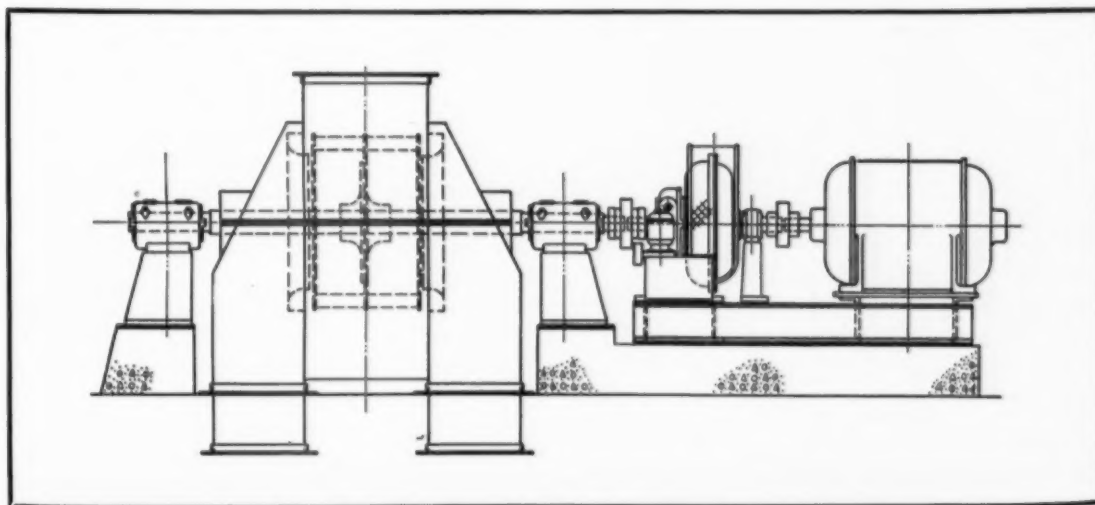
Induced-draft fan, adjustable-speed fluid drive and constant-speed motor
